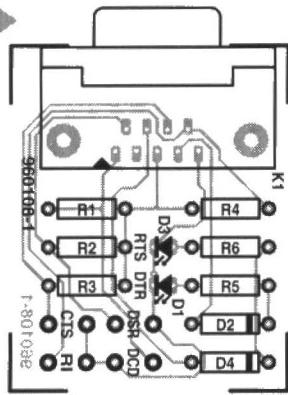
Track layout and component mounting plan of the printed circuit board designed for the project (board not available ready-made).
